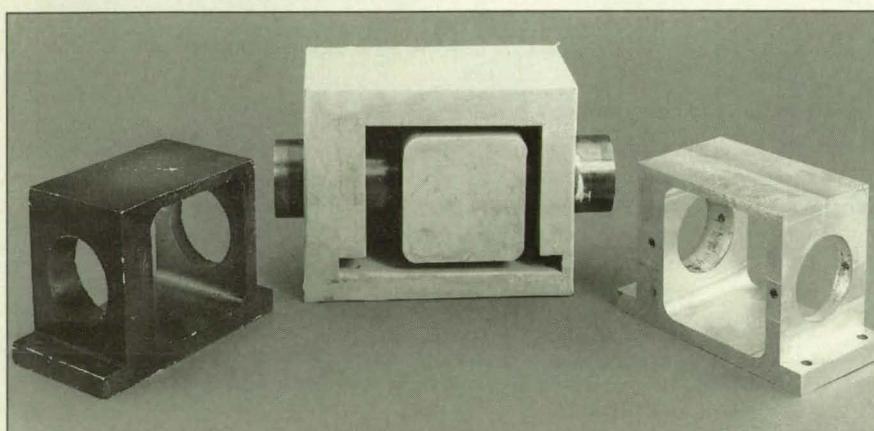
A Dimensionally Stable Optical Mount (left) is shown with a master pattern (right) and a silicone rubber mold (center).
